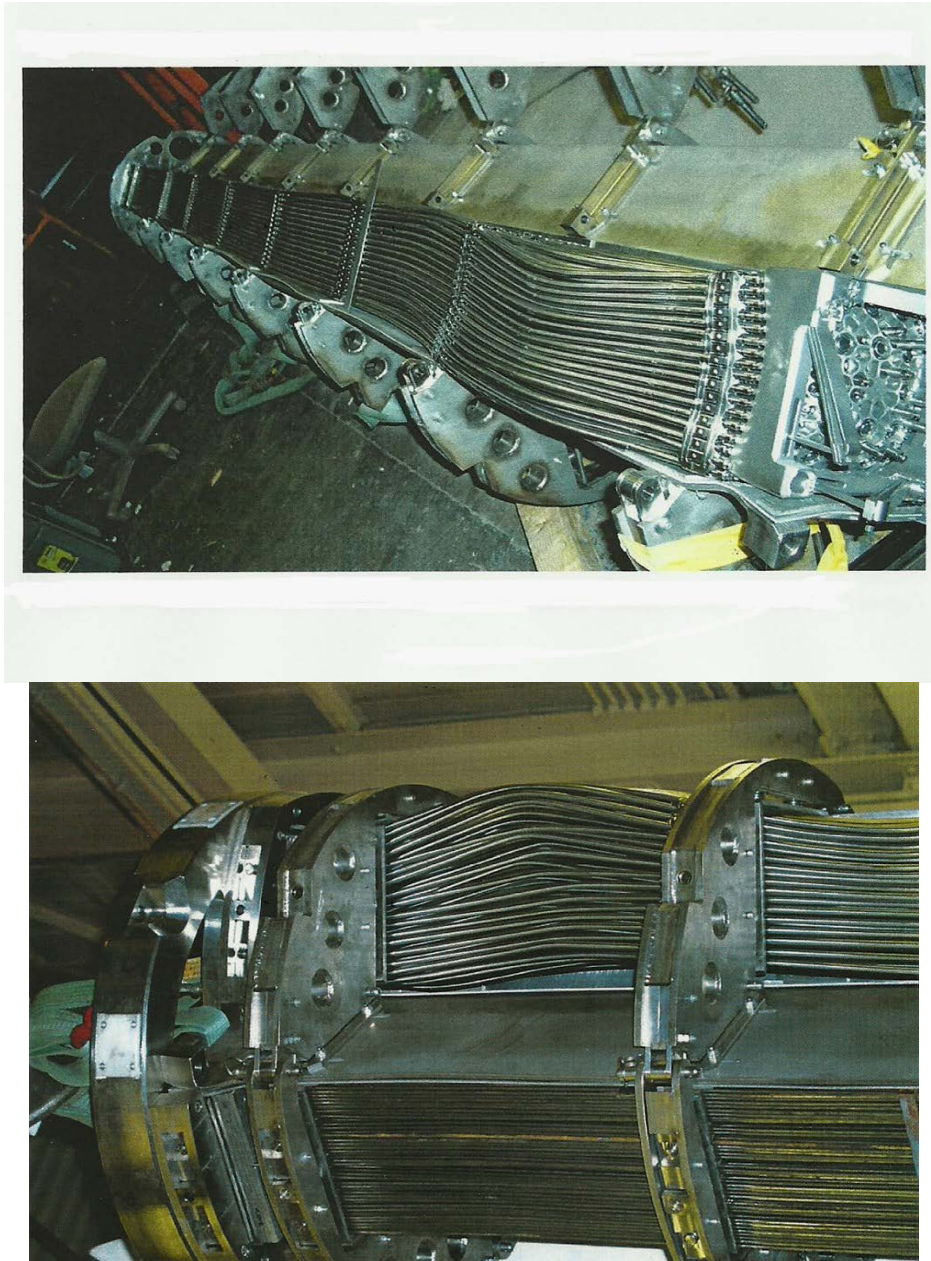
Photographs illustrating assembly fuel rod buckling after a 9-m end drop test [19]
